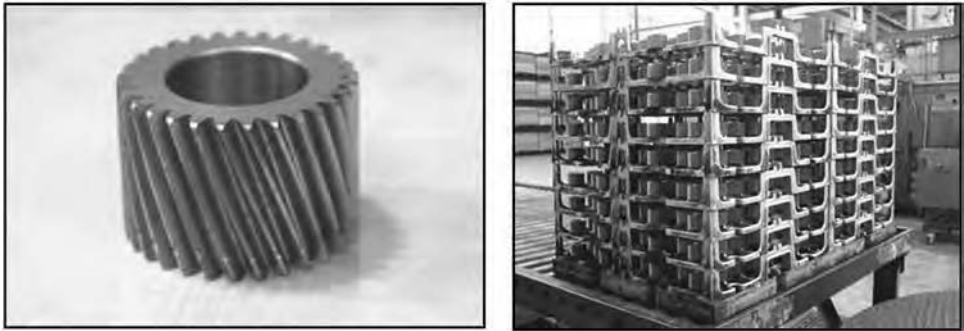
Final-drive pinion planetary gear (diameter = 31 mm, 24 teeth) and production load (9 layers with 1056 pieces total)
